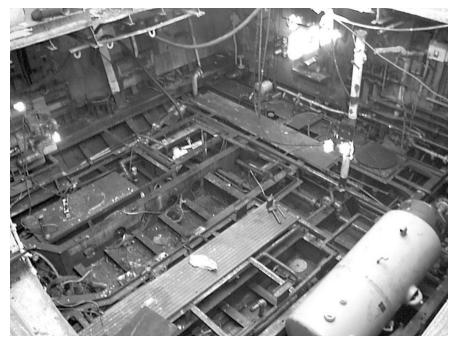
Red Beach* Engine Room Stripped of Machinery and Ready for Final Cleaning
